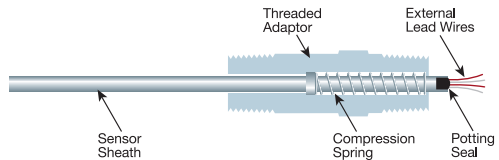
Spring Loaded Threaded Style
